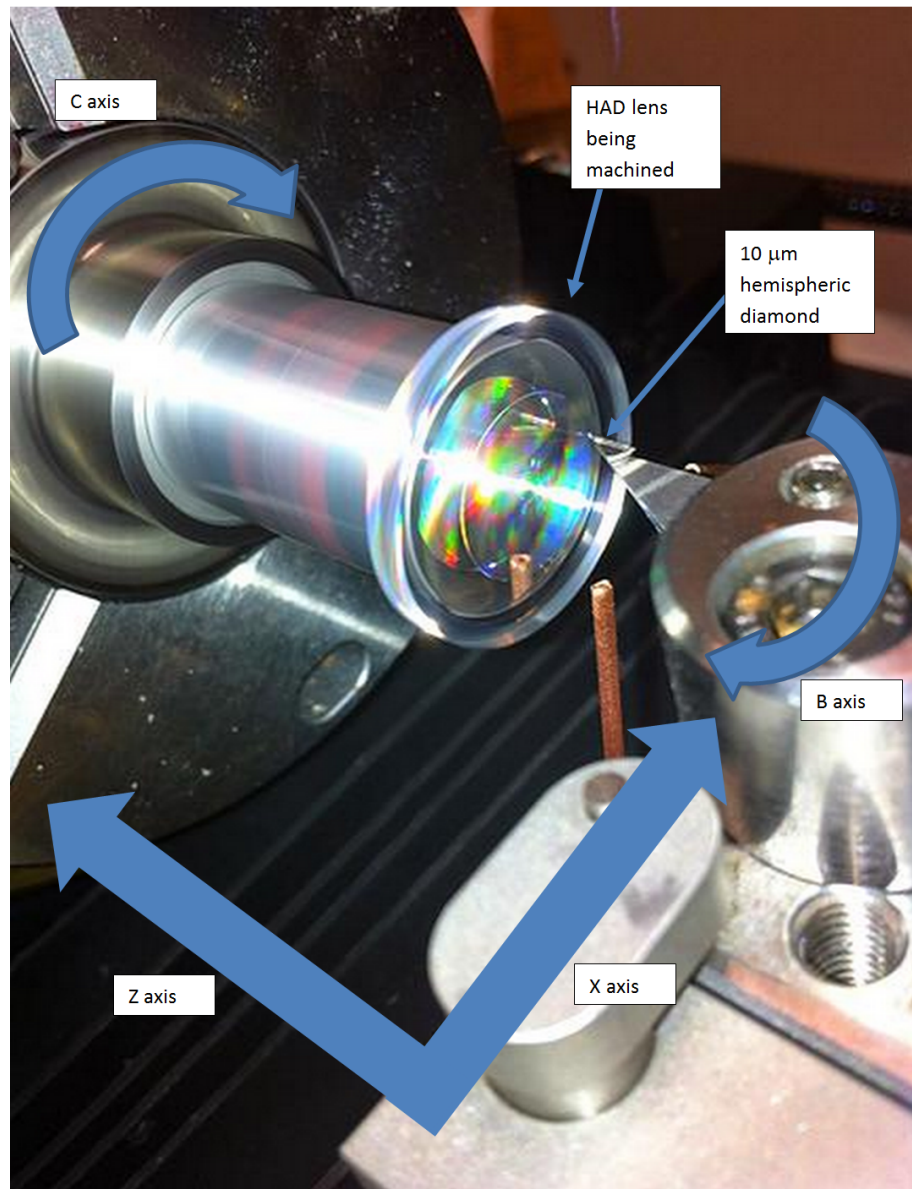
Picture of diffractive lens being manufactured on a SPDT machine.
